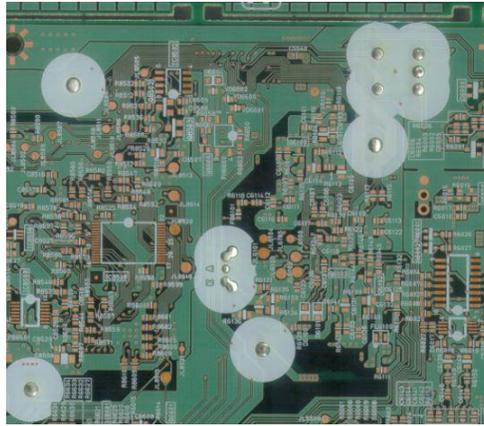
Selectively soldered PCB with white areas where solder joints are located.
